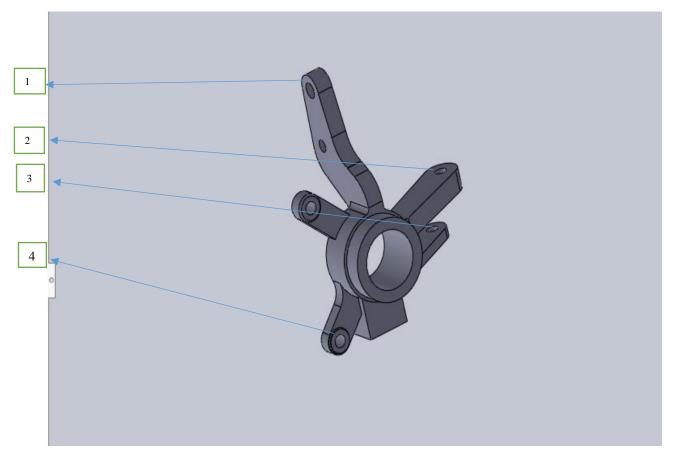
Steering Knuckle; 1-Suspension mount; 2-Steering arm; 3-Disk brake pad mount 4. Extra arm.
